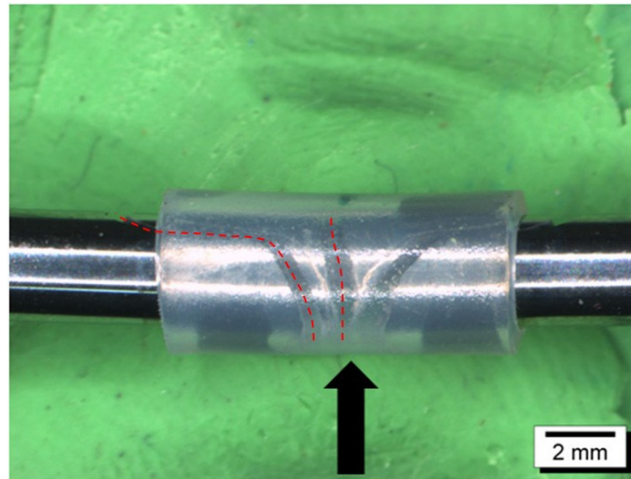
Shrink tube attached to a four point bending specimen showing typical fracture paths for four point bending loading conditions
